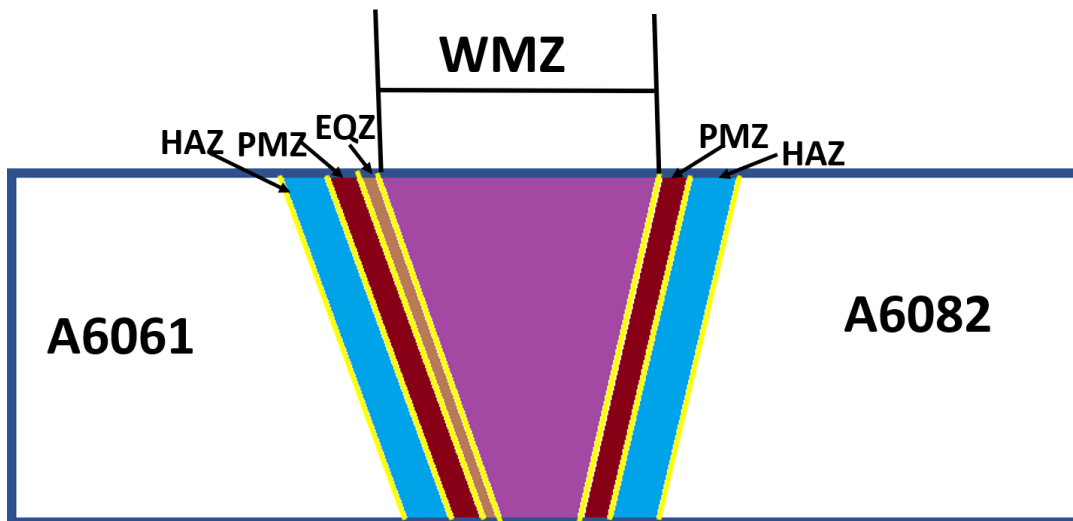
Schematic diagram representing different zones of both sides of the CMT welded A6061-T6 and A6082-T6 joint using ER5356 filler wire
